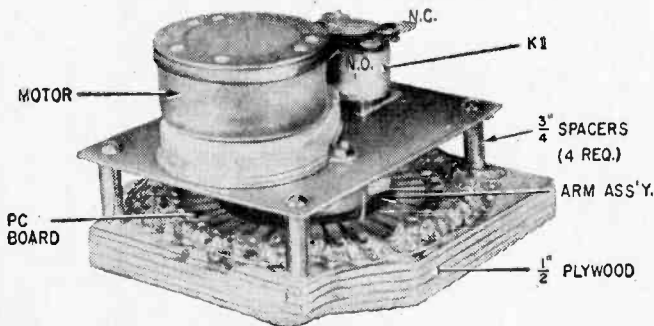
Assembled drive unit shows motor, relay K1 and lamp commutator assembly. Proper alignment is very important.
